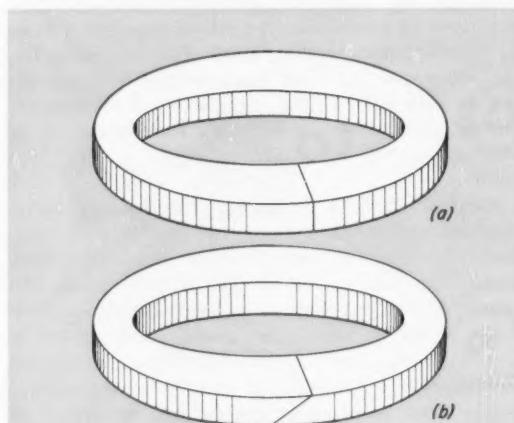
Butt or square joint, a, and bevel or skive joint, b in compression packing rings.
